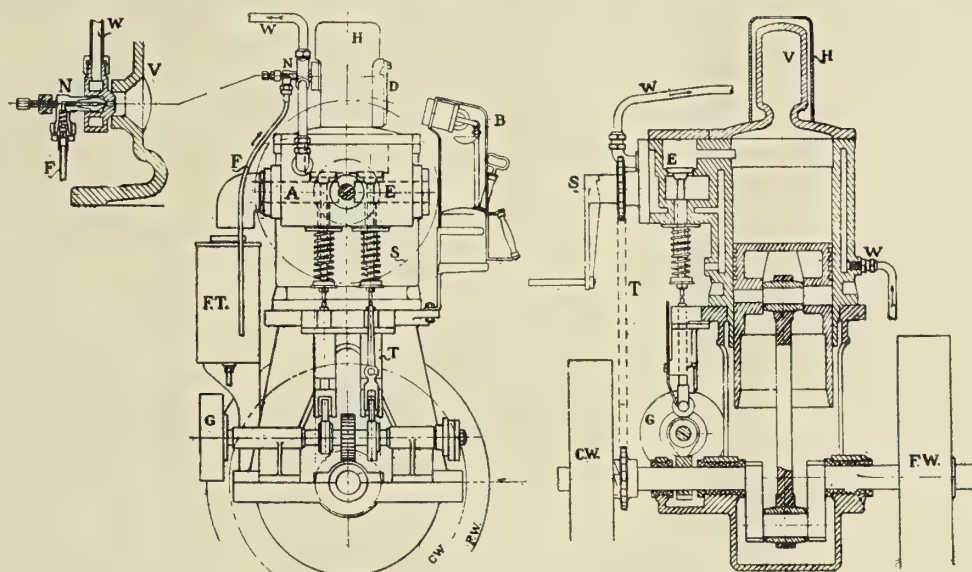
DETAILS OF SINGLE-CYLINDER DAN MOTOR.
